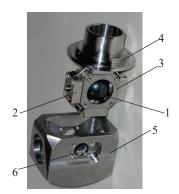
Assembling the spherical support: 1 - ball; 2 - support inserts; 3 - frame; 4 - lid; 5 - casing; 6 - openings
